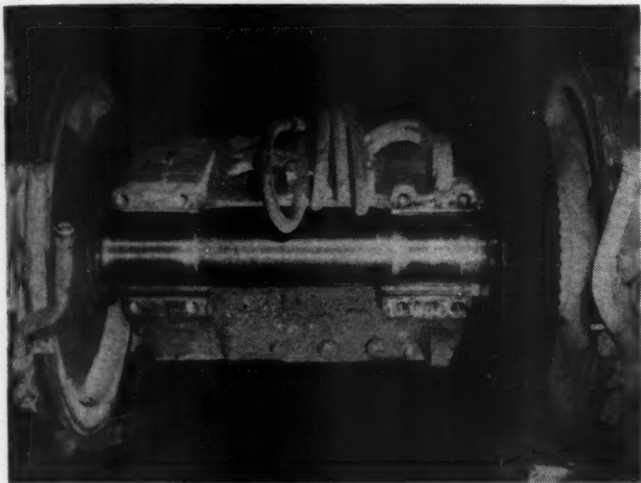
Bearing caps have been removed from the traction motor —The motor housing immediately behind bronze bearings must be built up by welding and then machined
